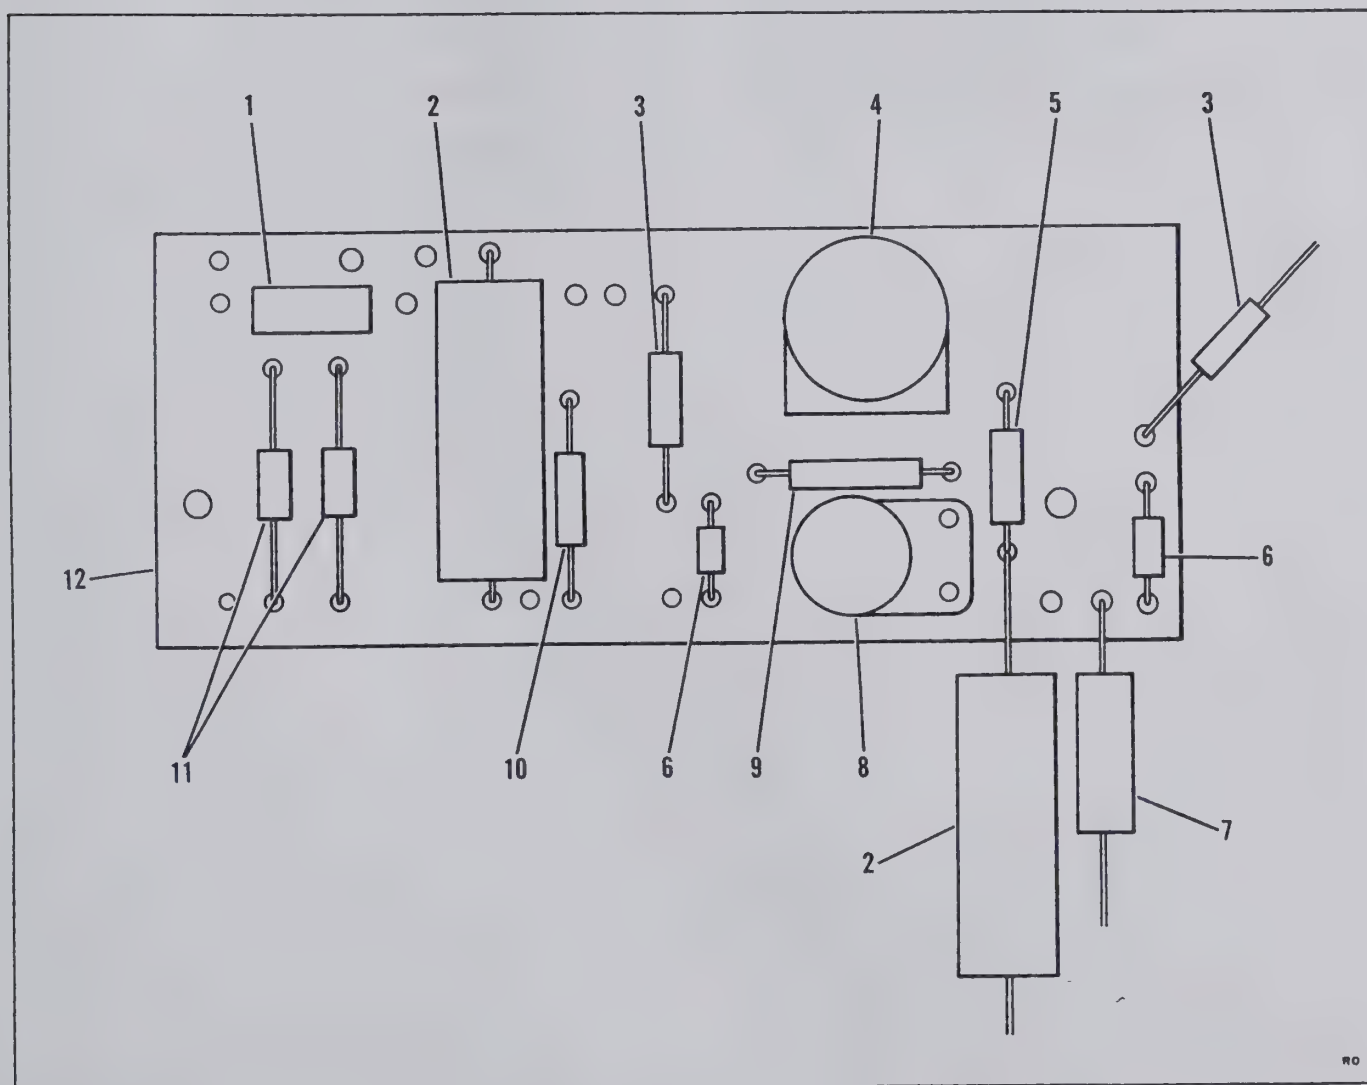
Printed Circuit Board Assembly, Part No. 400D-75F
